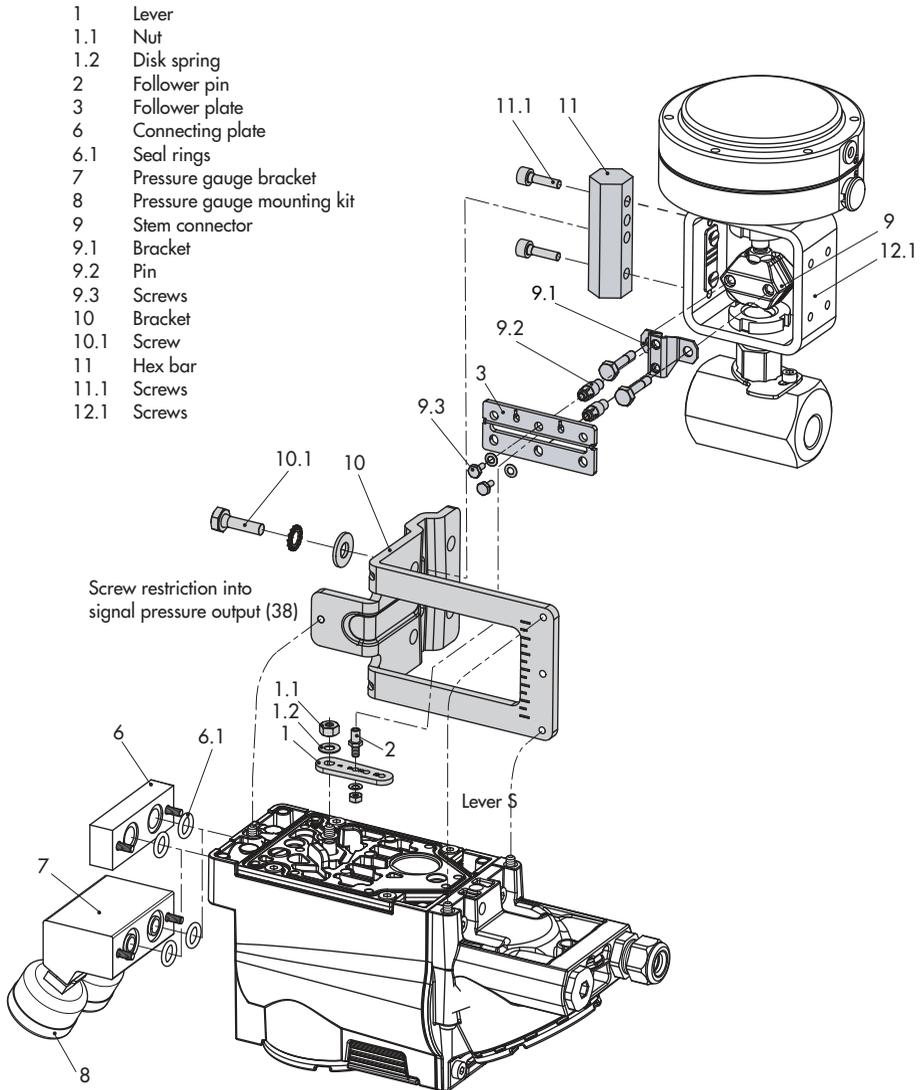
· Attachment to Type 3510 Micro-flow Valve
